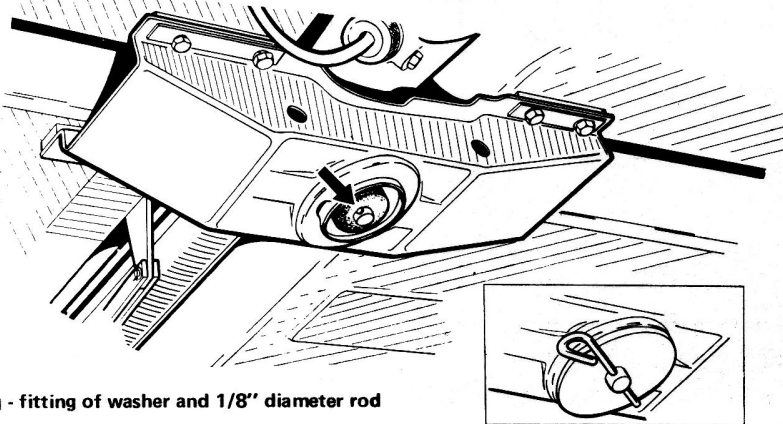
The rear engine mounting - fitting of washer and 1/8" diameter rod
